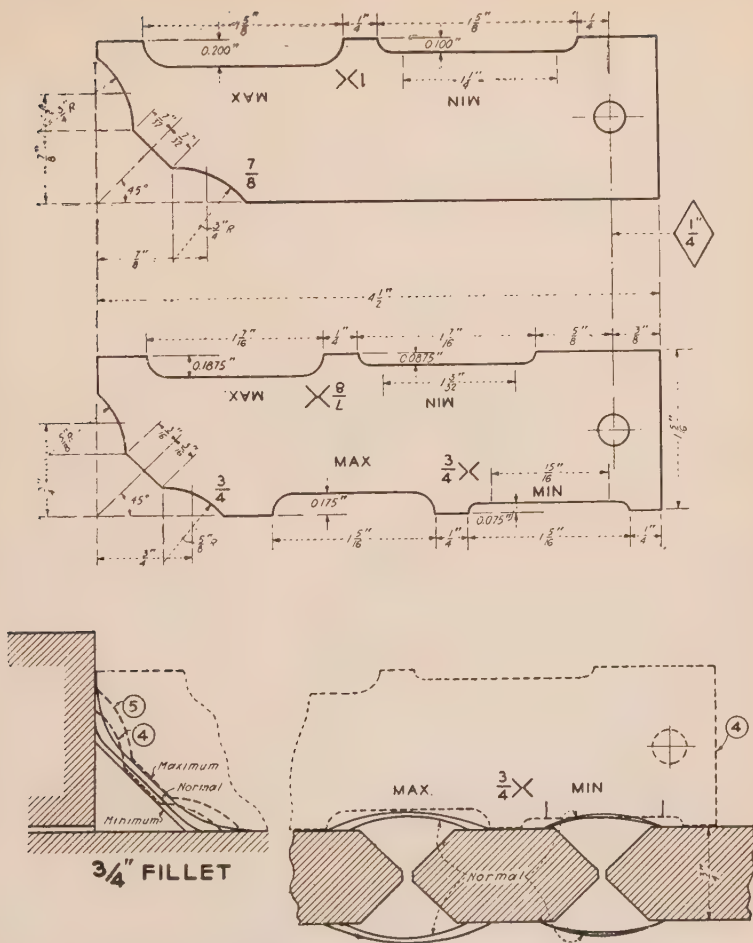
Gages for measuring butt and fillet welds and a sketch illustrating method of application to these gages.
